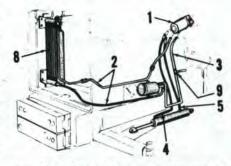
Drawing showing components of hydraulic power steering system. No mechanical linkage is used between the steering wheel and tractor front wheels. Note that the components are not located in position in which they are installed on trac-tor. Cooler (8) is not used on D-21 models.
